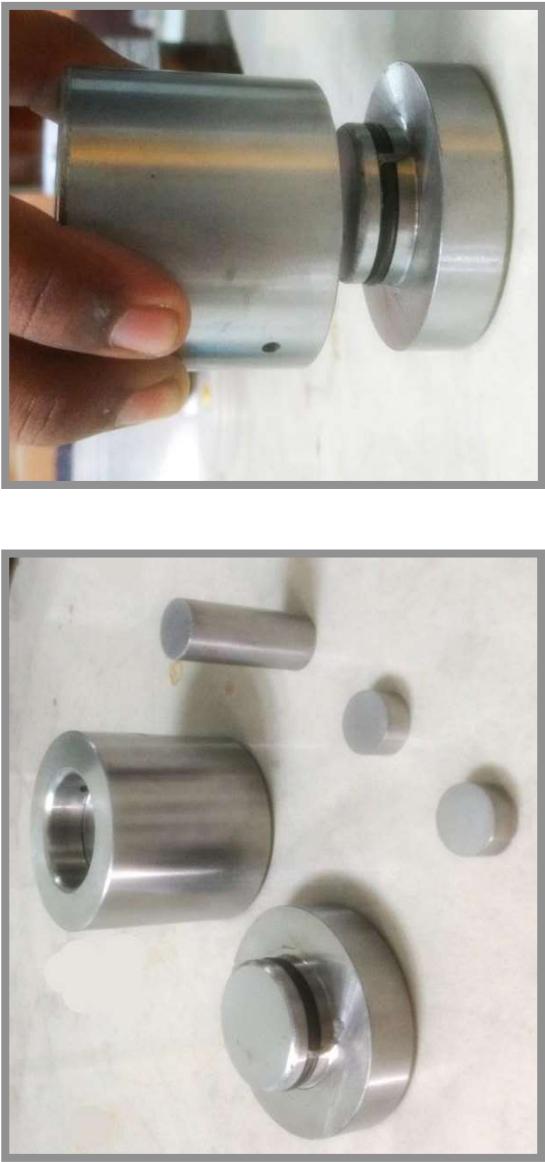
(a) Die, punch and support and (b) die-punch assembly
